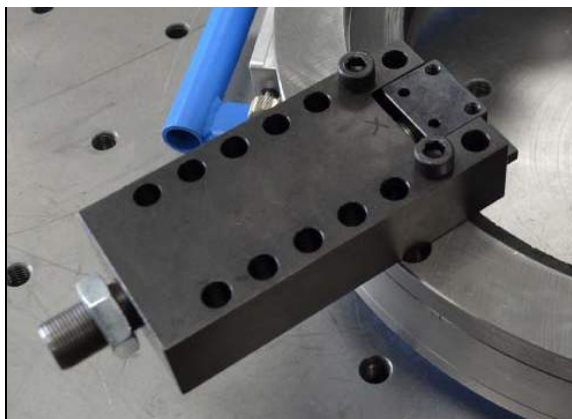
CHUCKING FOOT ASSEMBLY ATTACHED TO RDU (FF1200 SHOWN)
